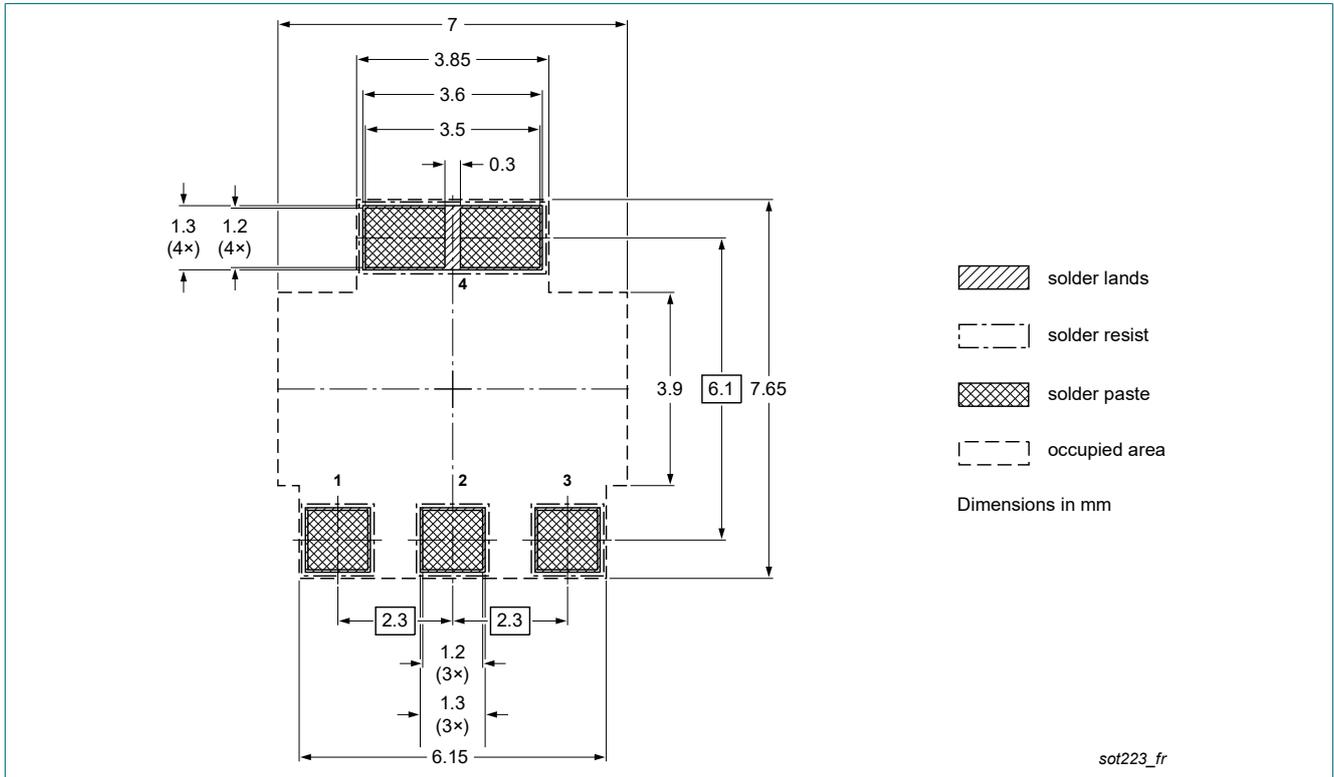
Reflow soldering footprint for SC-73 (SOT223)
